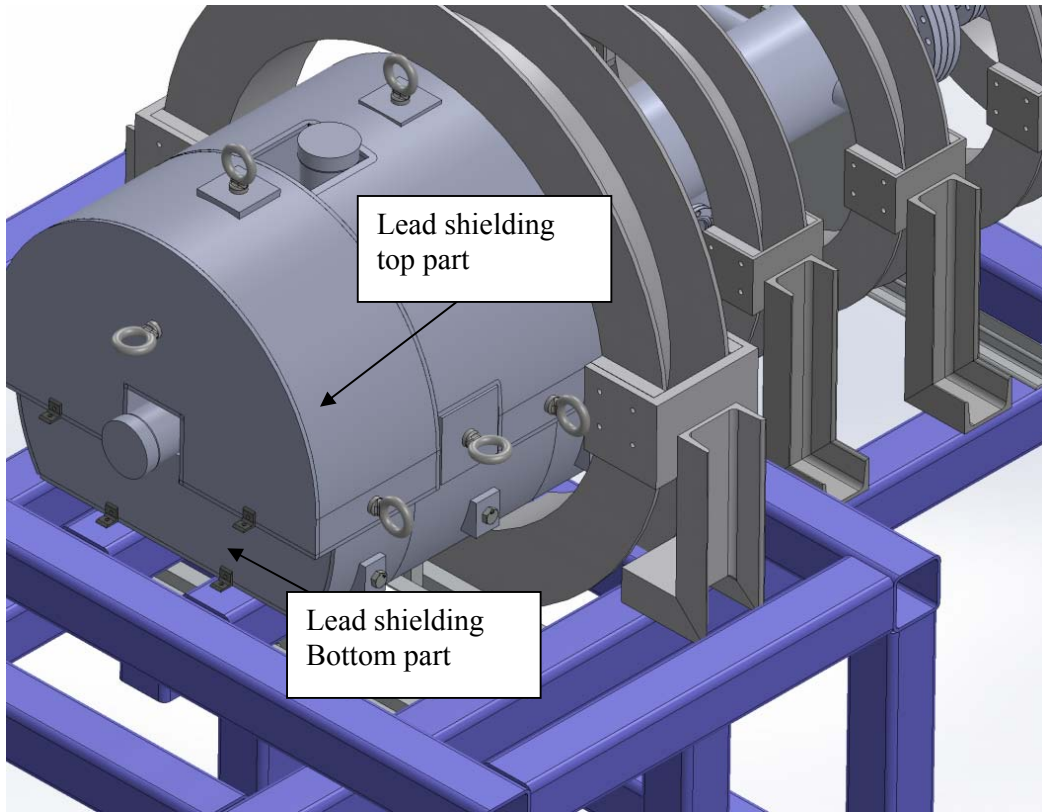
Schematics of complete shielding set up. It is an assembly of 5 aluminum casings with its own support table. All the parts are to be made of aluminum alloy-6061. The inside of the casings will be filled with molten lead.
